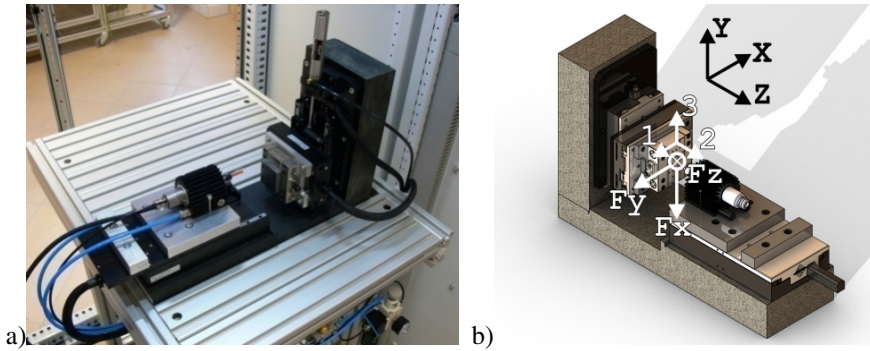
a) View of the micro-milling machine, b) Dynamometer and accelerometers direction
